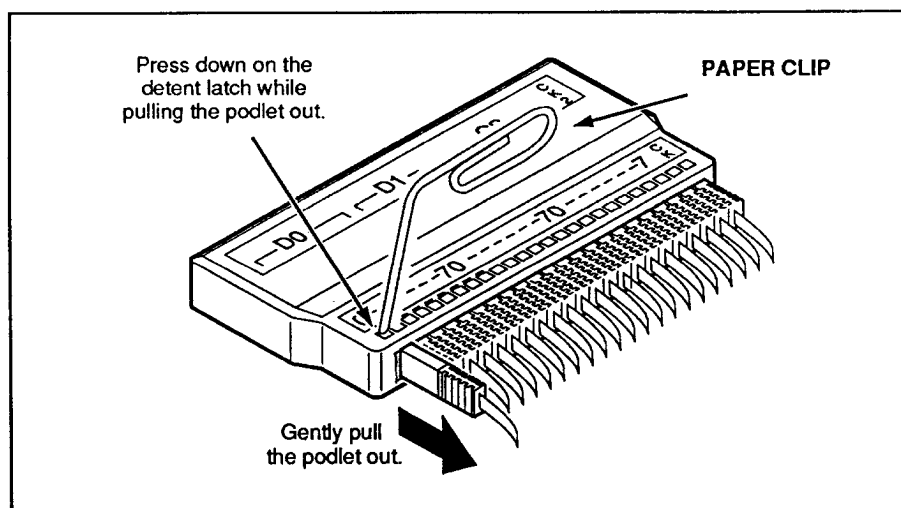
Removing a clock or an 8-channel probe podlet from the interface housing.
